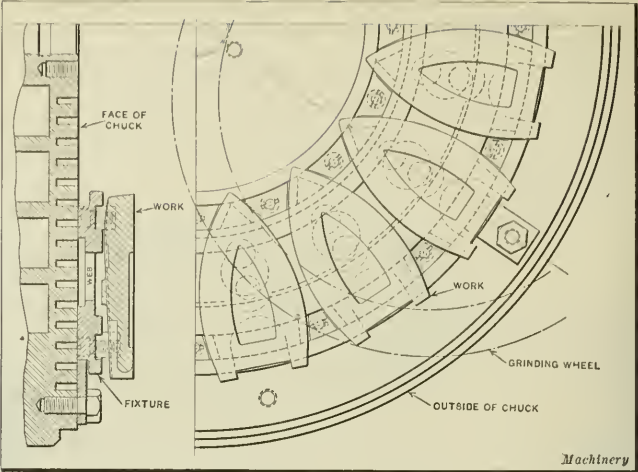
Special Fixture for holding Electric Flat-iron Clamps on Blanchard Magnetic Chuck
